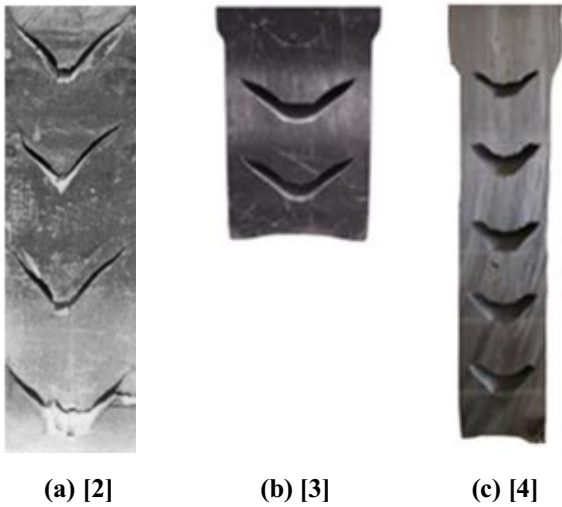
Typical examples of chevron cracks occurring in extrusion process
